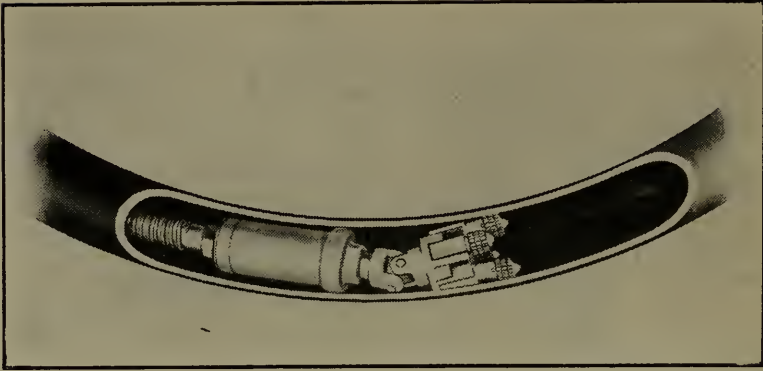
B—'Cyclone' Water Tube Cleaner working in curved boiler tube.
